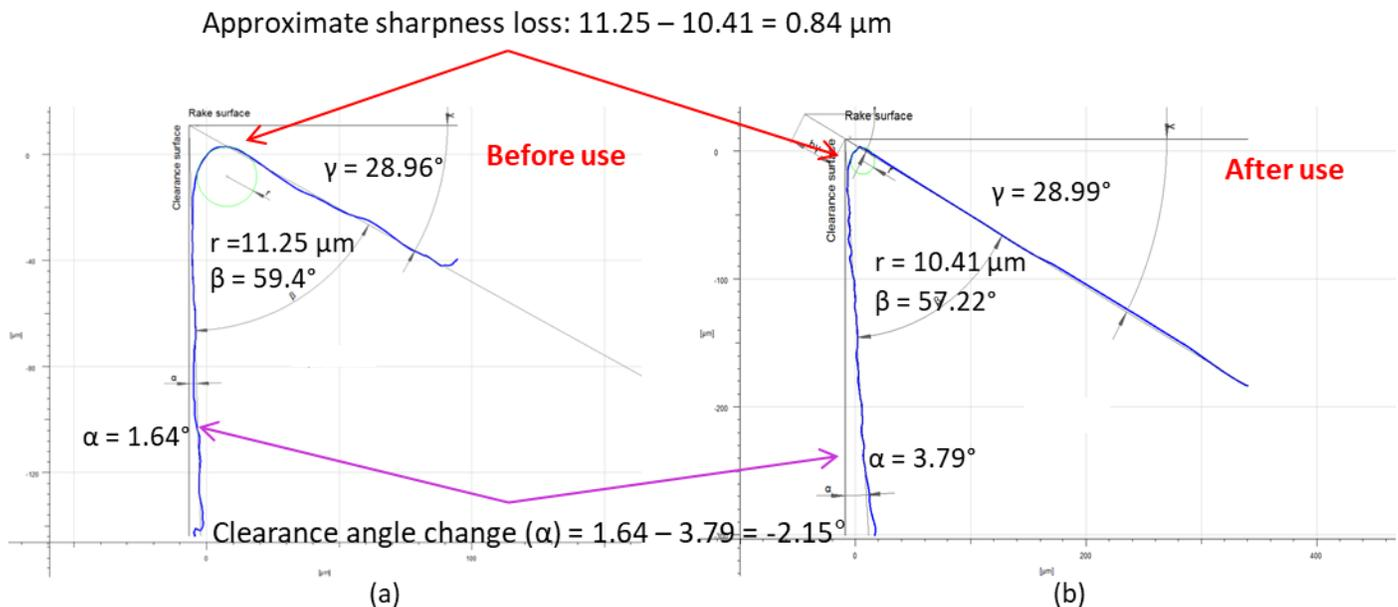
Tool tip radius, rake angle, clearance angle and wedge angle, (a) before use (b) after use
